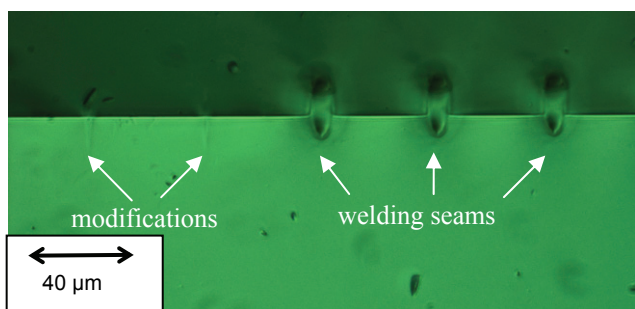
Cross-section of 2 modifications (left) and 3 welding seams at the interface.
